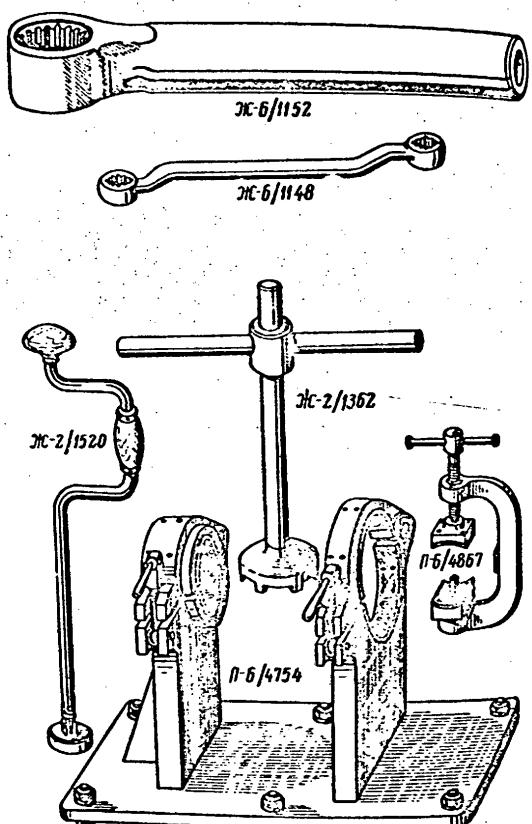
TOOLS AND FIXTURES FOR CRANKSHAFT ASSEMBLY
